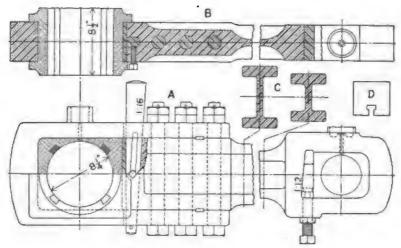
Locomotive Connecting-rod, cross-head in Fig. 288. Scale 1 to 12.
